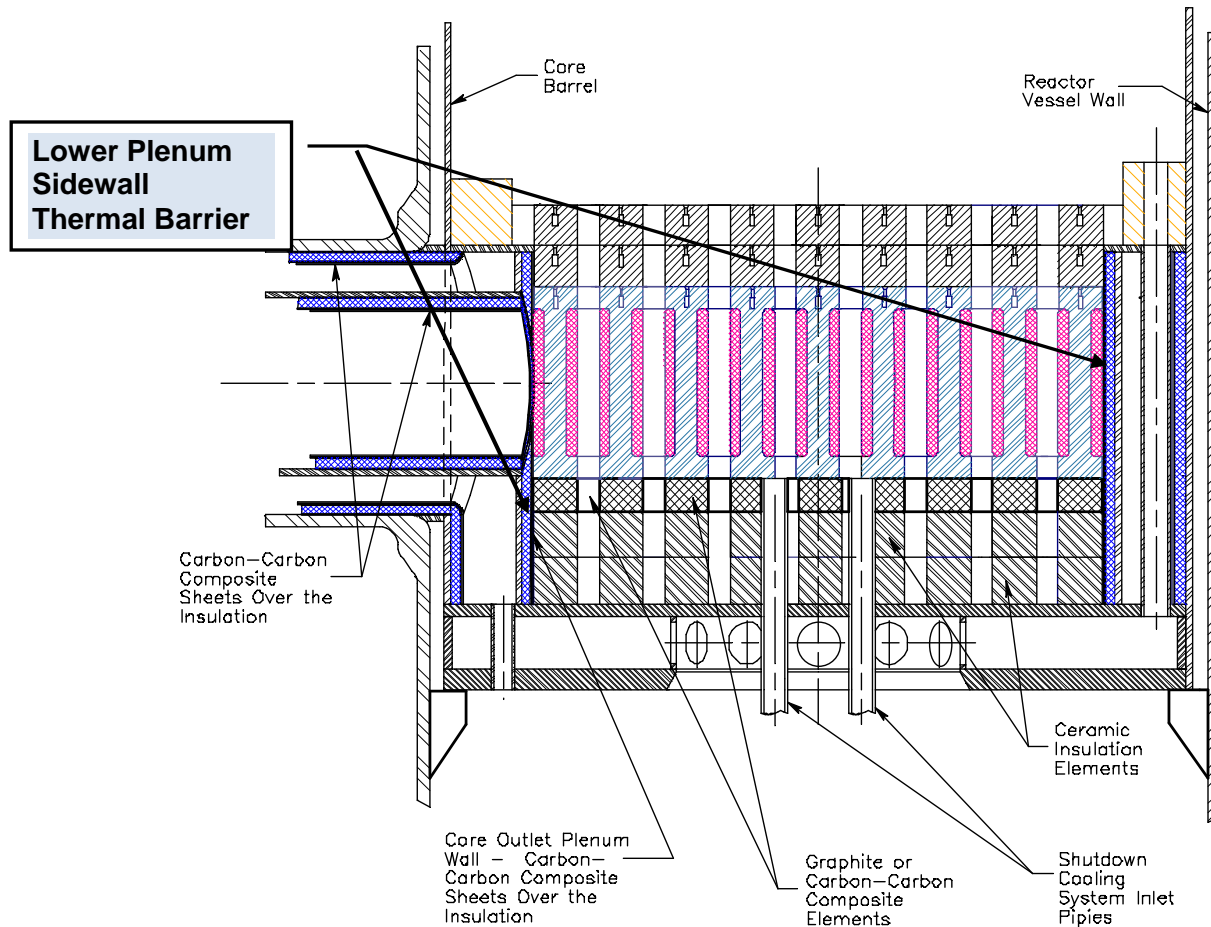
Lower plenum sidewall thermal barrier surrounding the core exit plenum
